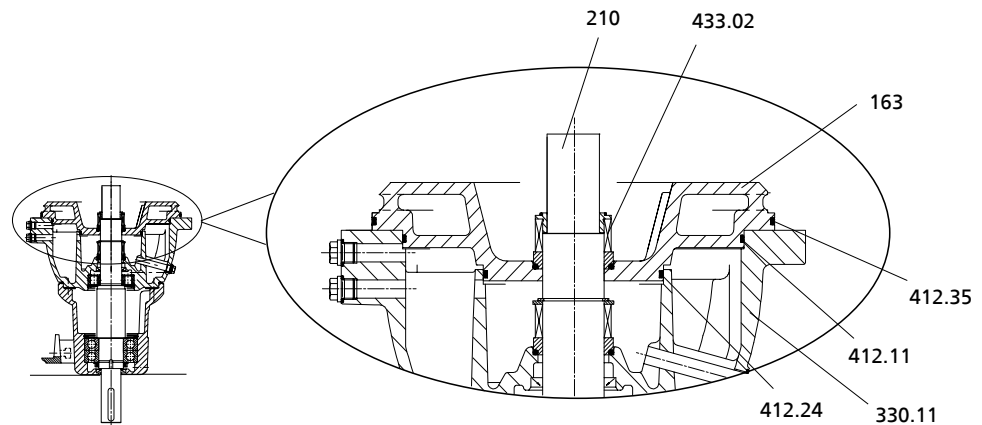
Pump-end mechanical seal (bearing brackets S01 - S07)
